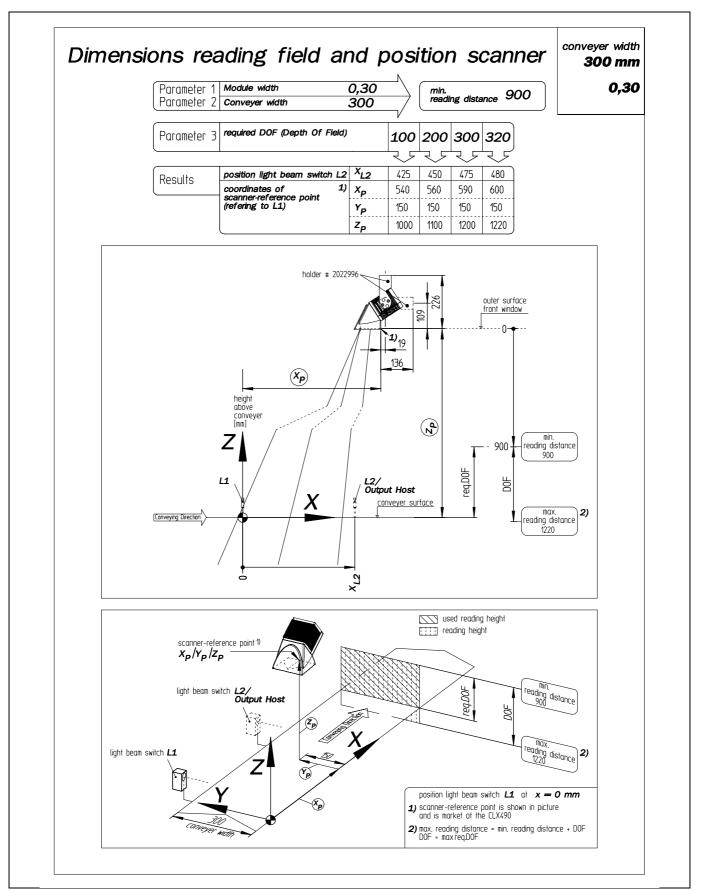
Required mounting position of the CLX above the conveyor belt (resolution 0.30 mm, conveyor belt width 300 mm)
